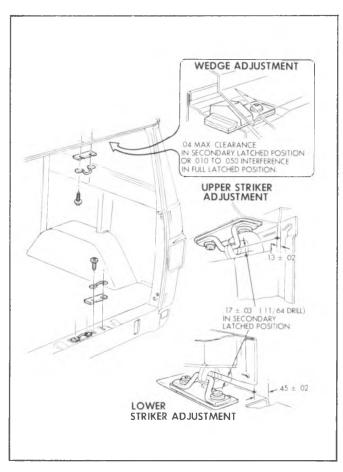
D-128--Rear Door Striker and Wedge Adjustment
